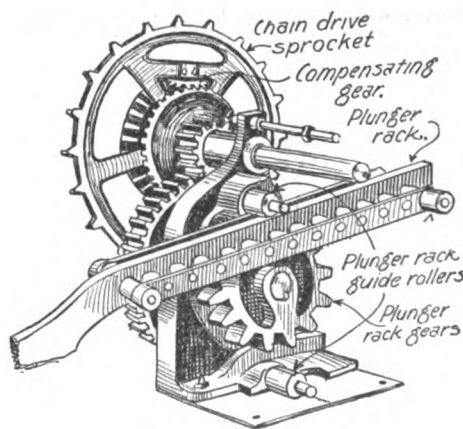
Details of the apparatus by which the hay-baler is operated by engine power.
